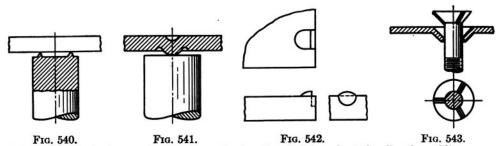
A ring projection can be turned or coined on the shaft in order to localize the welding area.
